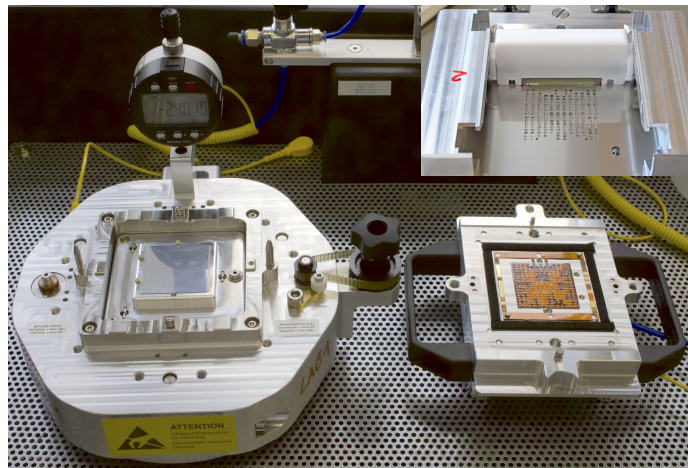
ITk Pixel Quad Assembly Tooling V2: BM jig (left) and flex jig (right) with BM and flex on top, glue dots are already distributed on the back of the flex. Top-right photo: stencil tool and spatula on the stencil and flex jig, ready for glue distribution.
